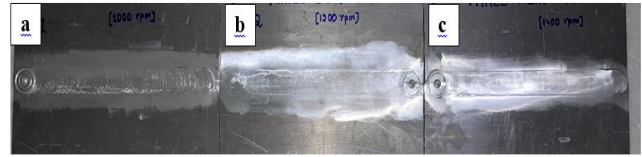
5(a) FEP weldment at 1000 rpm 5 (b) FEP weldment at 1200 rpm 5 (c) FEP weldment at 1400 rpm
